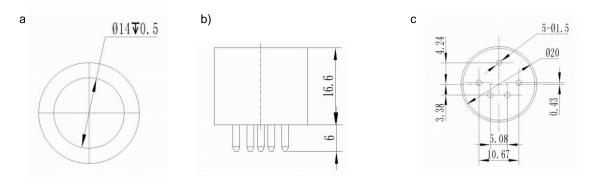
Mechanical dimensions in mm a) top view b) projection view c) bottom view
